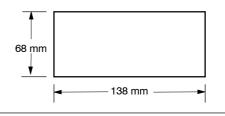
Dimensions for Cutting a Hole in the Mounting Surface of the TD 200C and TD 200
